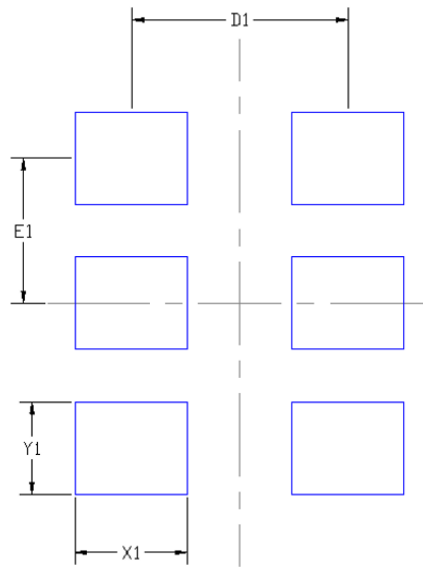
Si548 (2.5×3.2 mm) PCB Land Pattern
